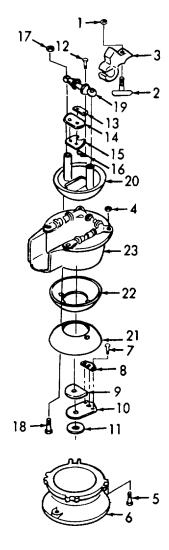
Bilge Pump, Disassembly/Reassembly.
